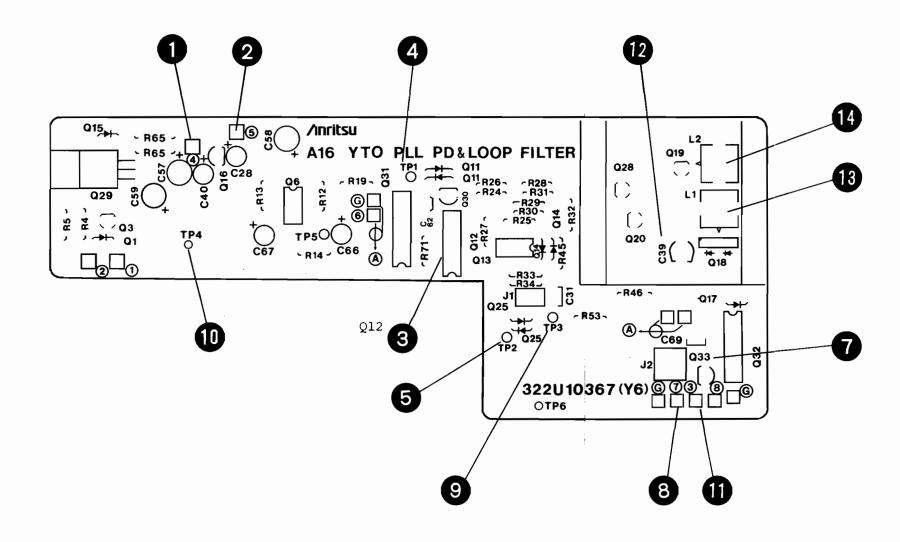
(a) Al-Al6 YTO PLL PD & LOOP FILTER PC Board Parts Layout (Parts Side) 15
